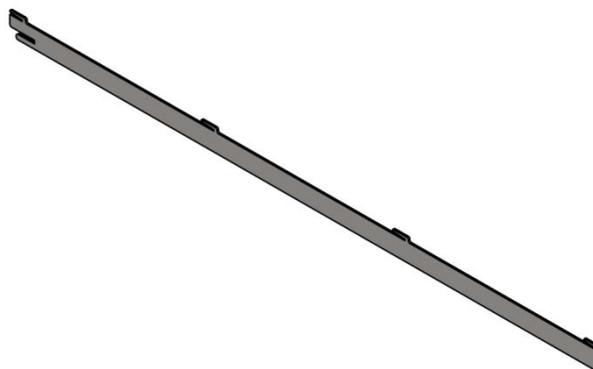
Mounting connector with a diameter of 100 mm.
